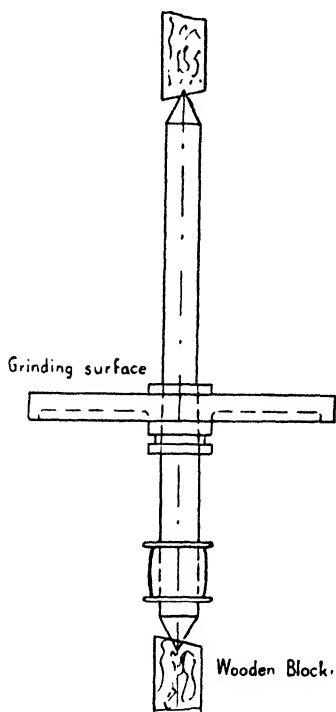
Construction of a usual cast-iron scaife with spindle and wooden bearings
